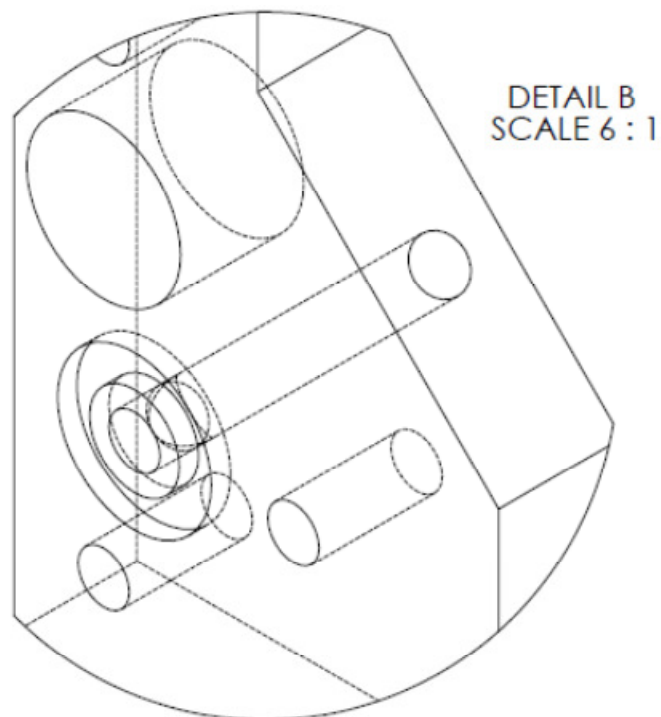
Side view of part 1 of the reference electrode fixture. Dimensions are in inches.
